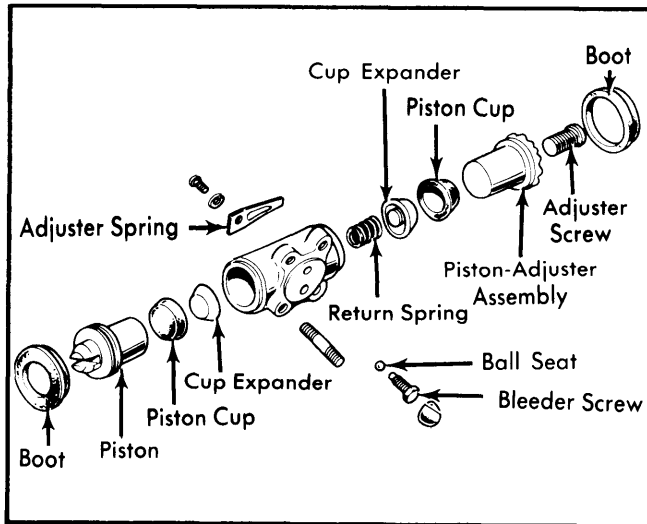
Disassembled View of Courier Rear Wheel Cylinder
